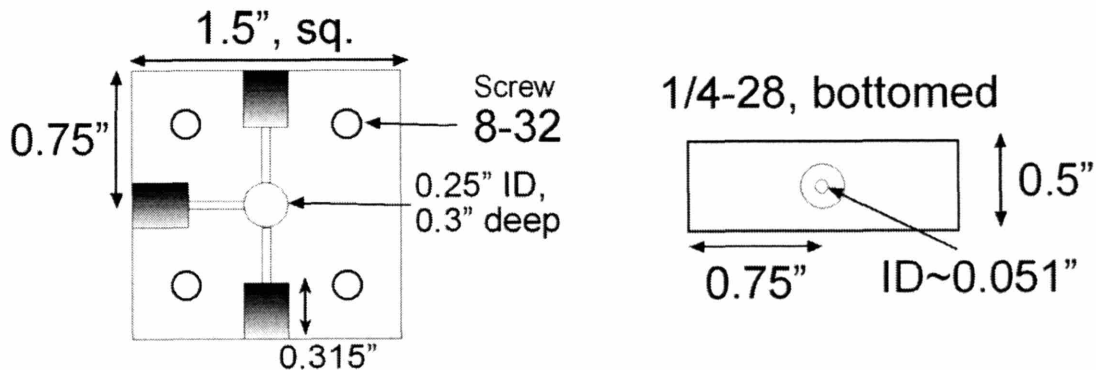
The top view of the aluminum mixer (left) shows the screw holes (shaded), flow channels, and center mixer. The side view (right) shows the other dimensions of the device.
